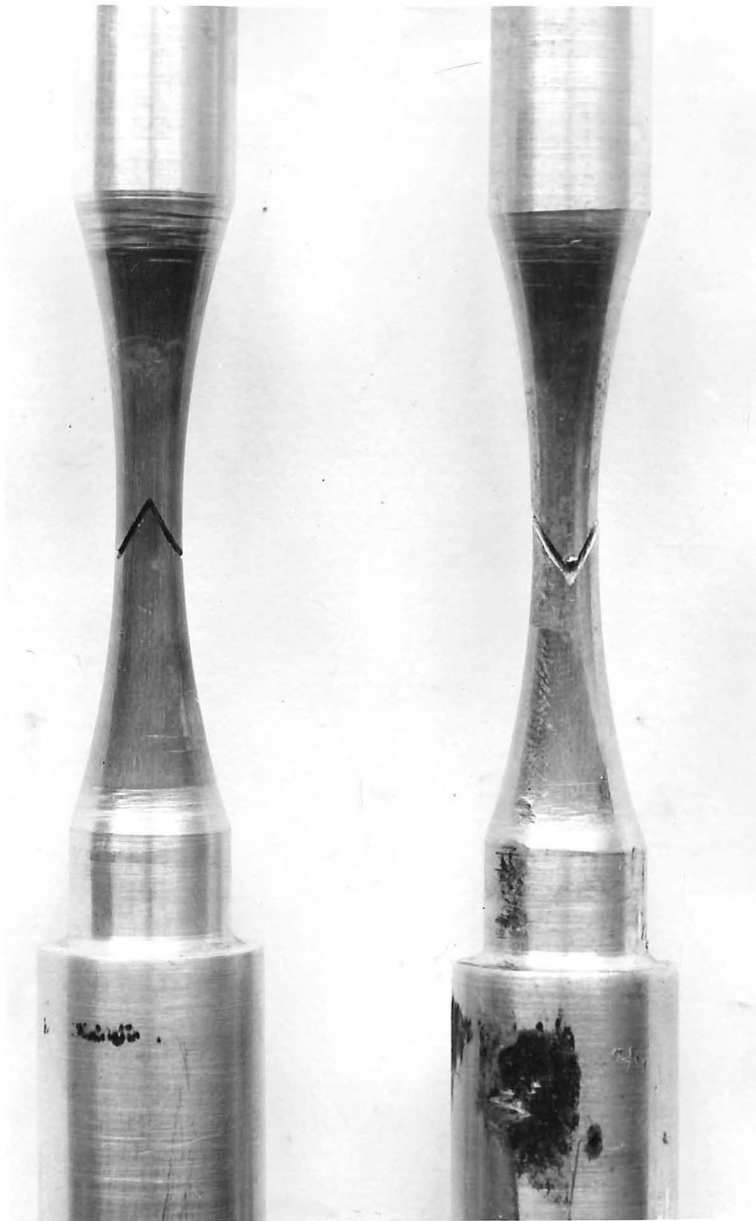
/25: Typical corrosion fatigue fractures in un-notched direct stress test specimens with superphosphate corrodent.
